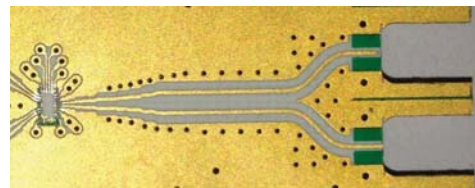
Typical high speed test interconnection, traces taper out from chip pitch to the connector footprint. In this case a miniSMP footprint is shown.
